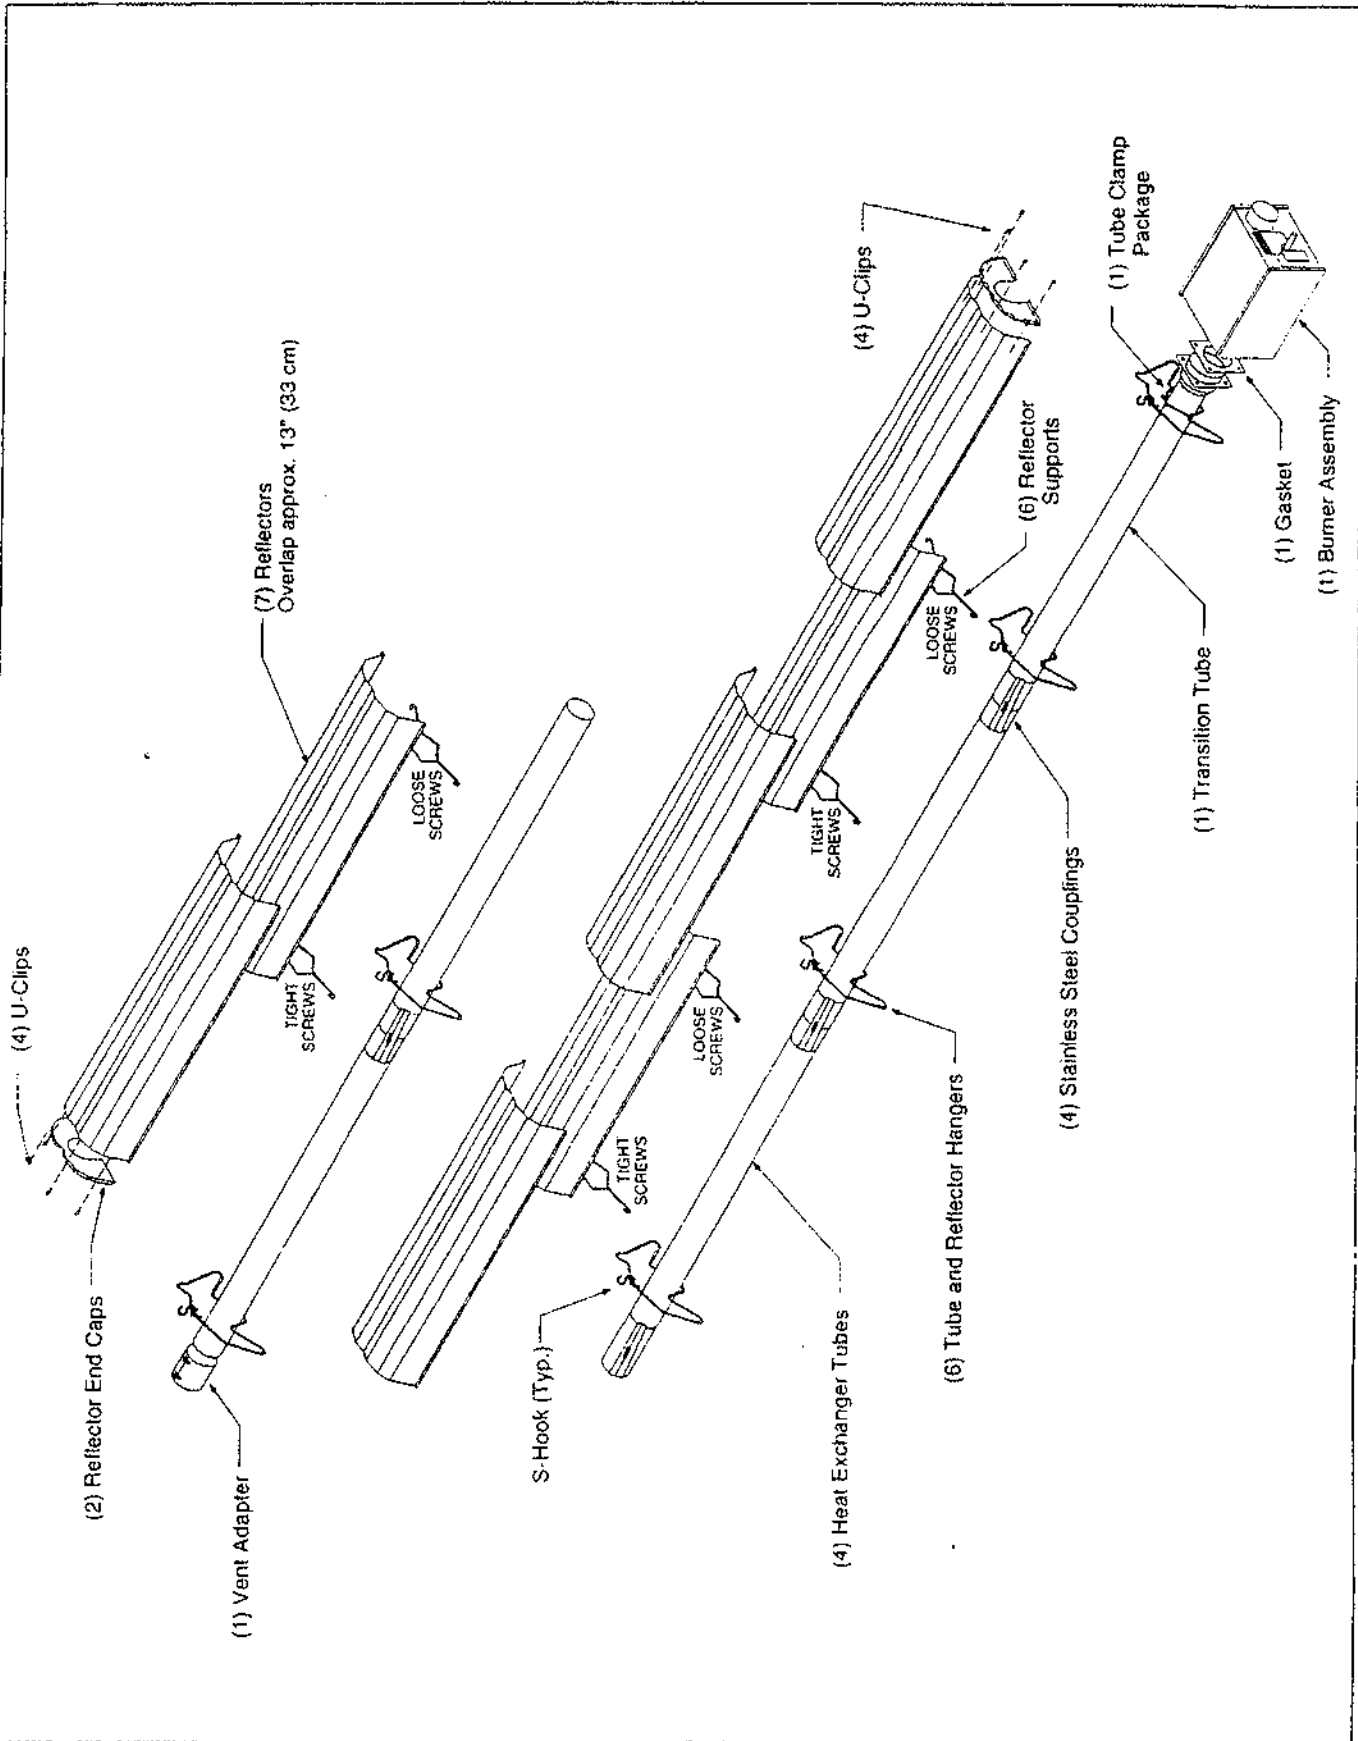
Assembly of 50 ft (15 m) Heat Exchanger System
